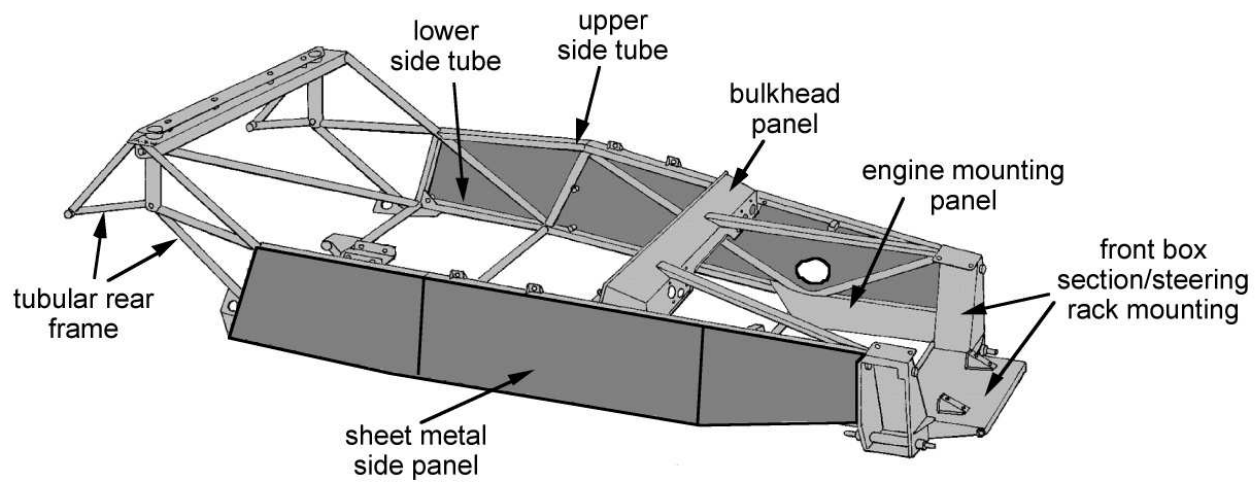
A schematic of the Lotus Seven Series 4 chassis showing all the body-to-chassis mounting points. Adapted from T. Weale, *Lotus Seven*, Osprey Automotive Publishing, UK (1991).
